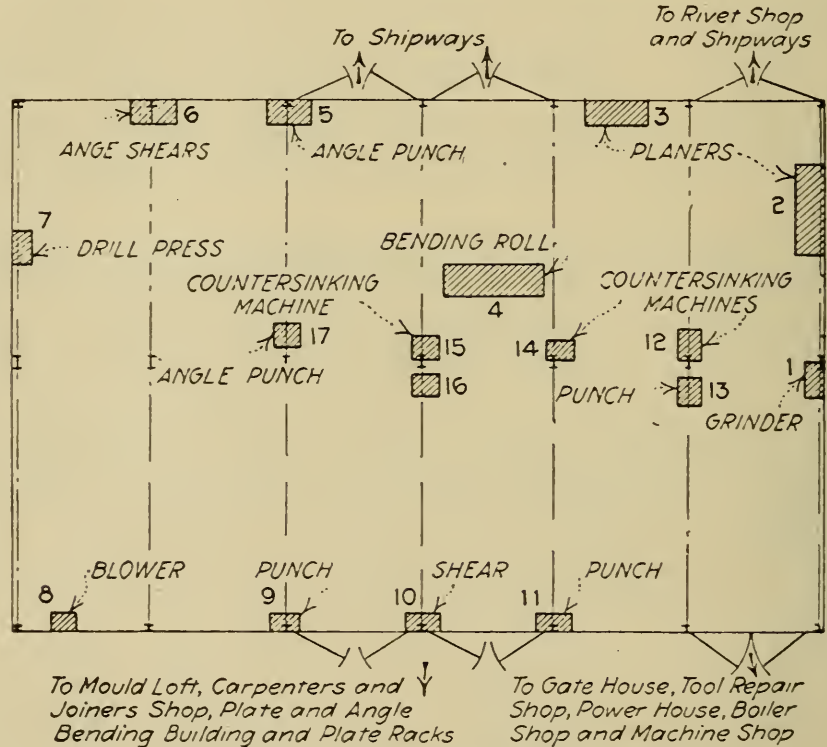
LAYOUT OF MACHINES IN PLATE SHOP
